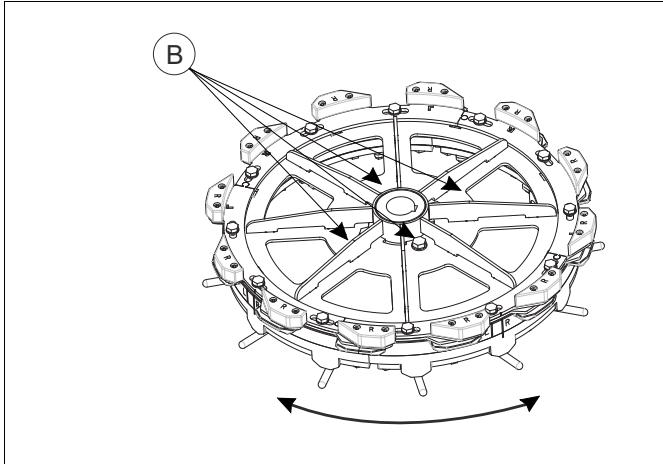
Adjusting the Shackle Carrier Pocket Timing
